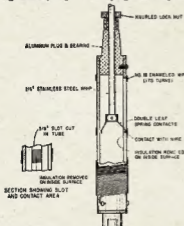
Cutaway drawing showing the construction of the loading coil. The dimensions can be varied to suit materials available.
